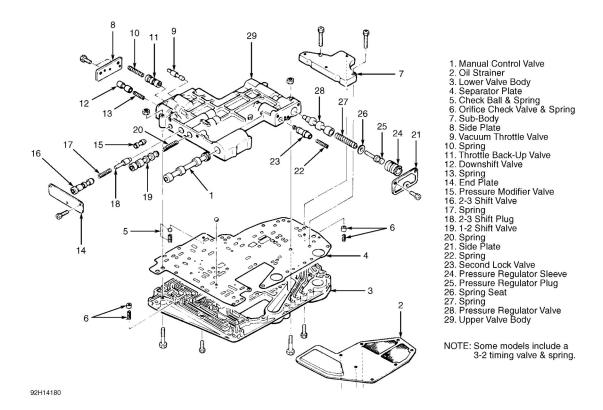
Exploded View Of Valve Body Assembly Courtesy of FORD MOTOR CO.
